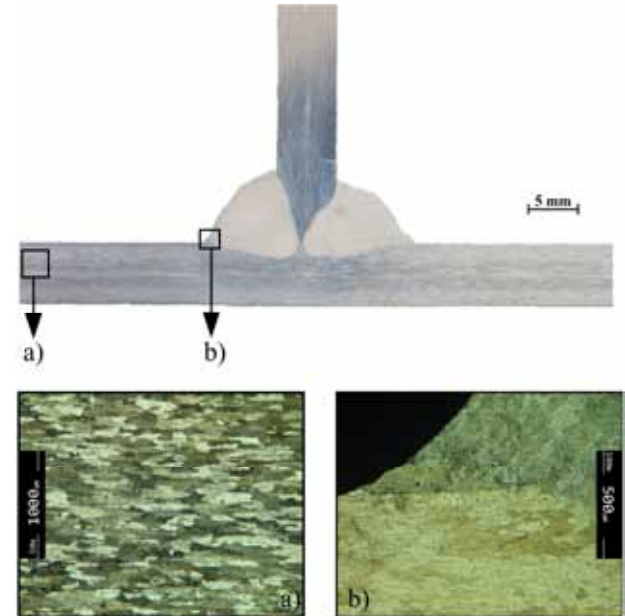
Metallographic analysis of MIG welds: a) base material; b) toe of weld.
